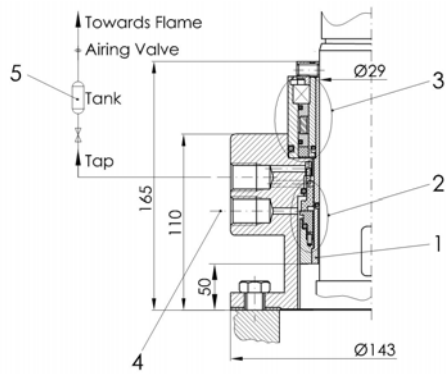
Mechanical- magnetic fluid combined seal for liquefied gas pump
